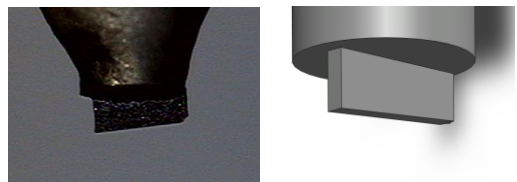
Photo of a tool fabricated by EDM (PCBN, width:100 μm)
